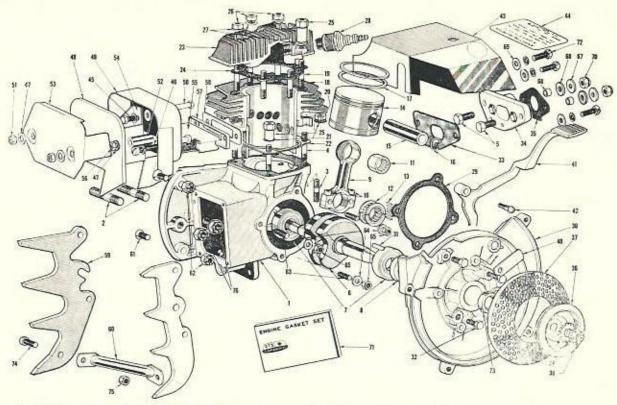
Exploded view of Model 275 chain saw engine. Other models are similar except for muffler design.
